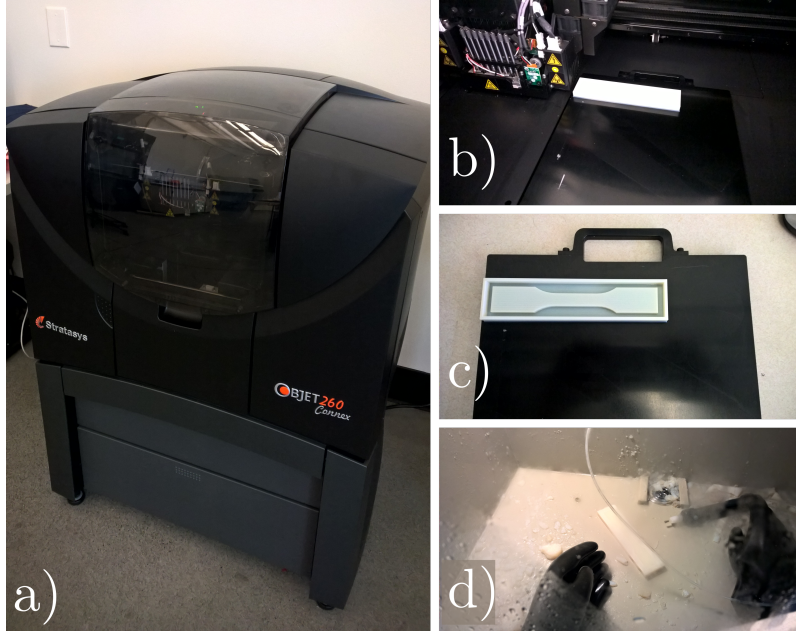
Objet 3D Printing Process: a) exterior of printer; b) inside of printer with dogbone mold positive; c) mold positive on printing tray; d) using water jet to remove support material
